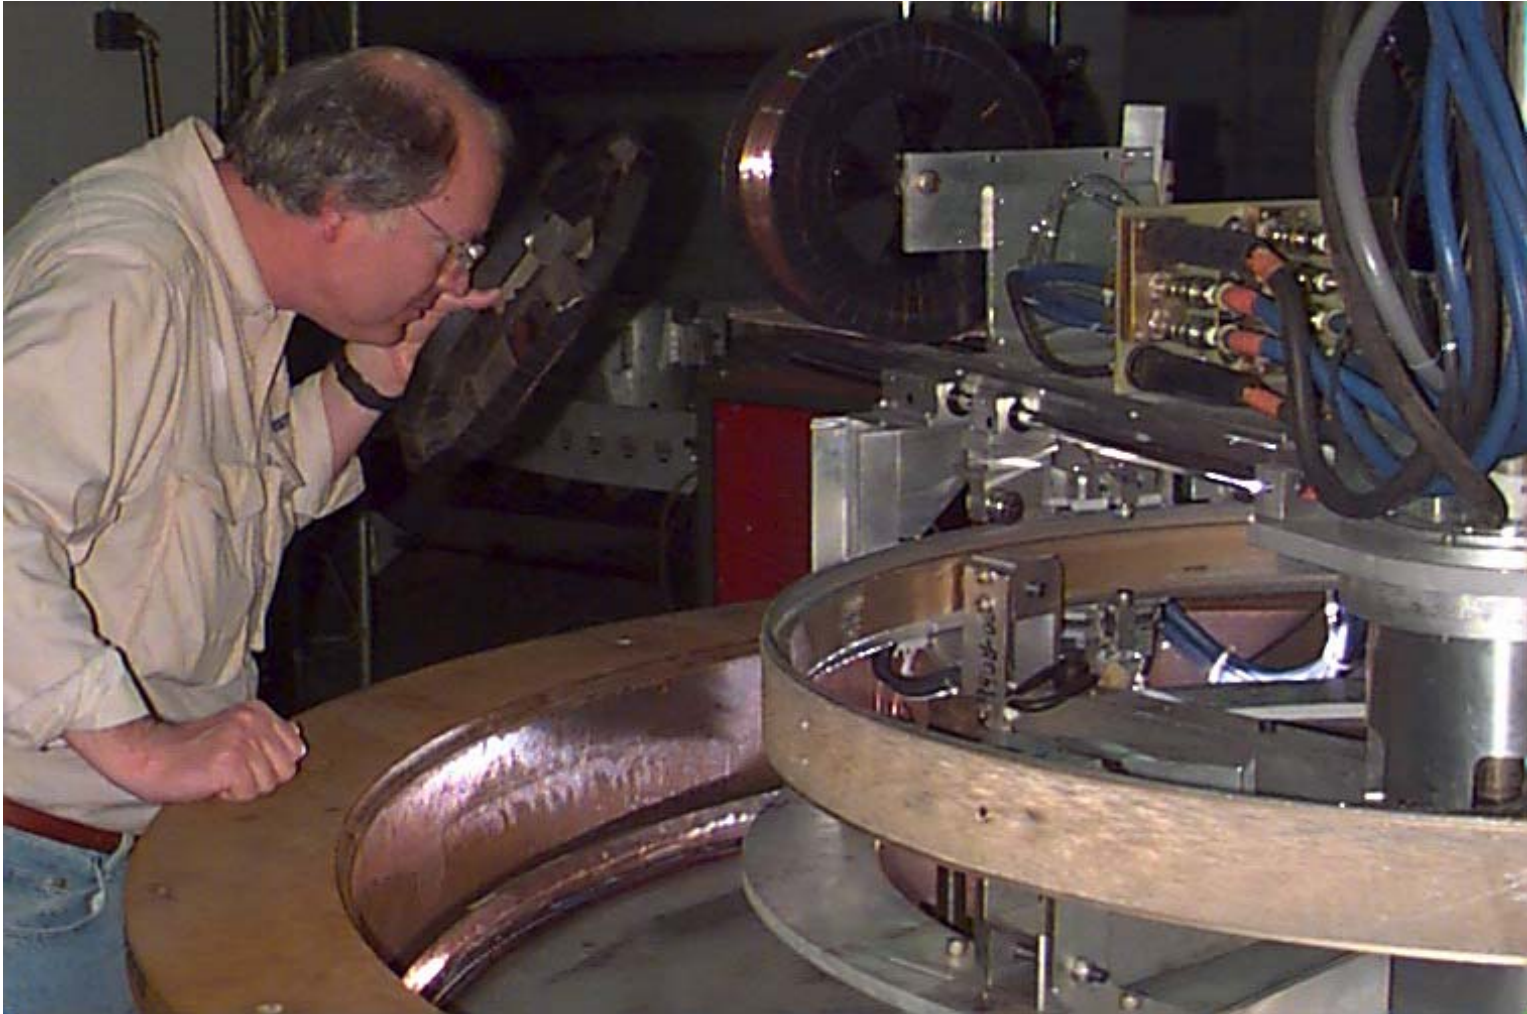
Photograph of semiautomatic rotary remote welding system
